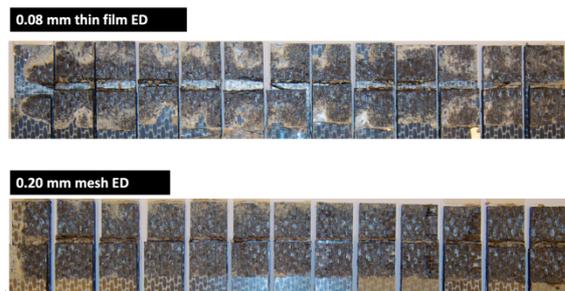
Fracture surface obtained after mechanical testing of adherends welded with the thin film and mesh energy director. Taken from [6].
